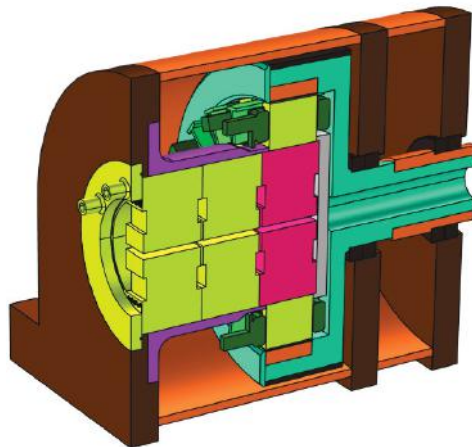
Design #2, cantilever design. The power electronics converter can be removed post assembly.
